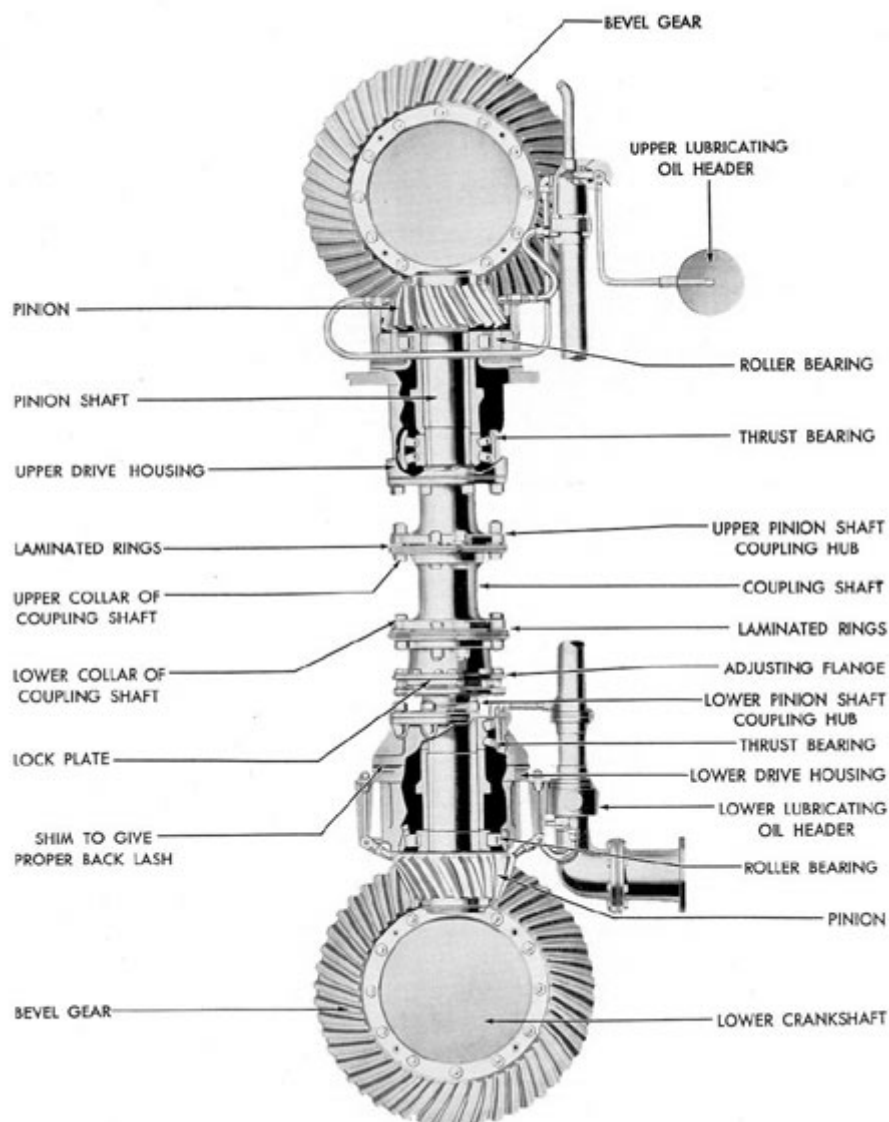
Assembled view of crankshaft vertical drive on 9-cylinder F-M engine.
